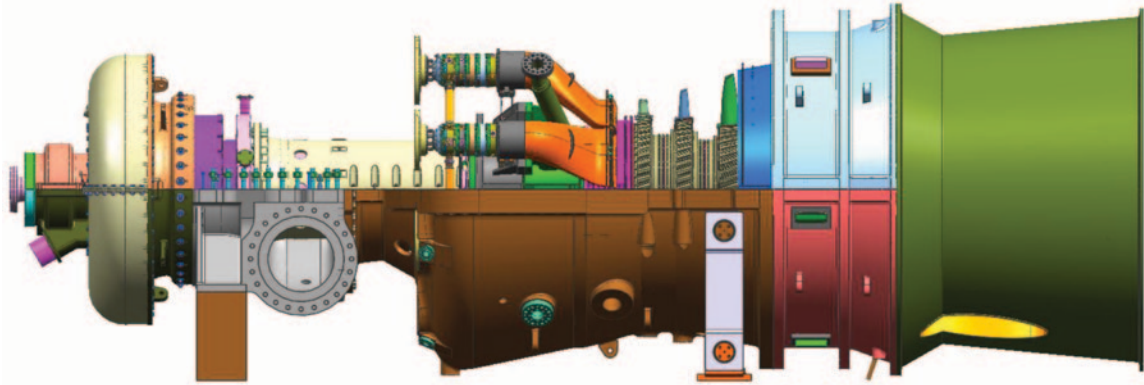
OFT-900 Concept Drawing (Top Casing Removed to Show Detail)
